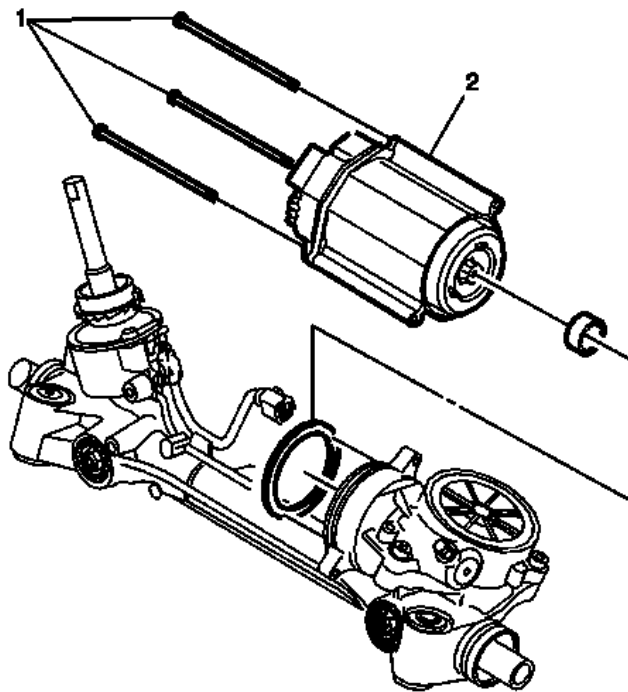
Power Steering Assist Motor & Bolts (NJ1)
